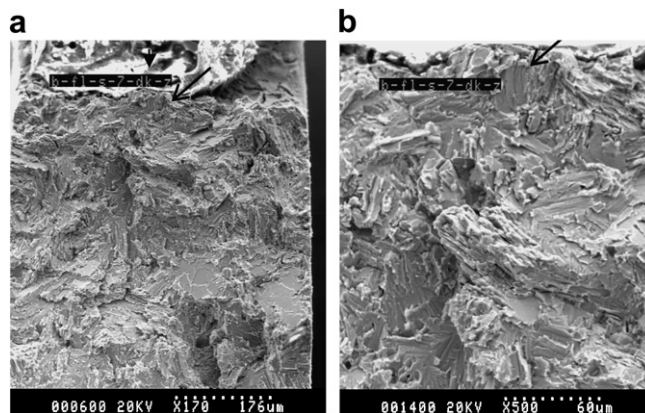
Fracture surfaces of in situ slit notch tensile specimen B-s-7. (a) A general view, the black arrow shows the origin of cracking and (b) a close-up view of the original critical crack which triggered cracking through the entire specimen.
